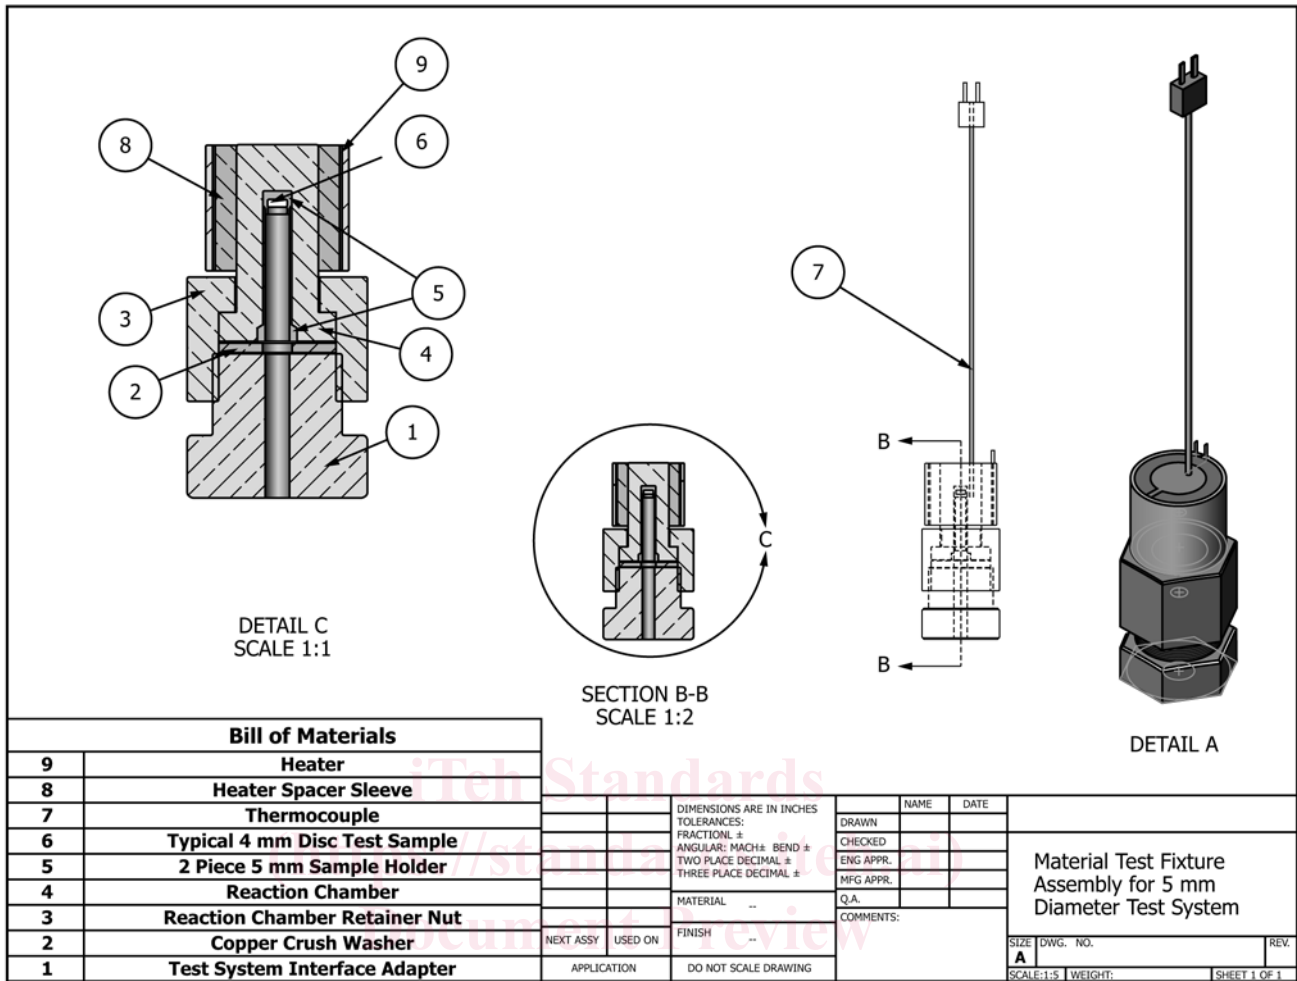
a Material Test Sample Reaction Chamber Assembly for 5 mm Impact Tube.
